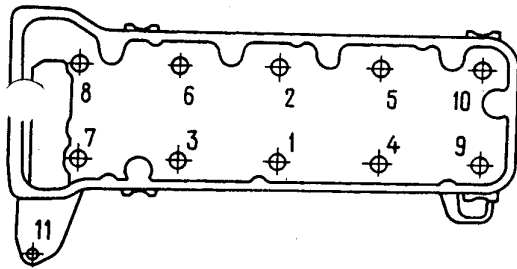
Sequence of Tightening Cylinder Head Bolt
